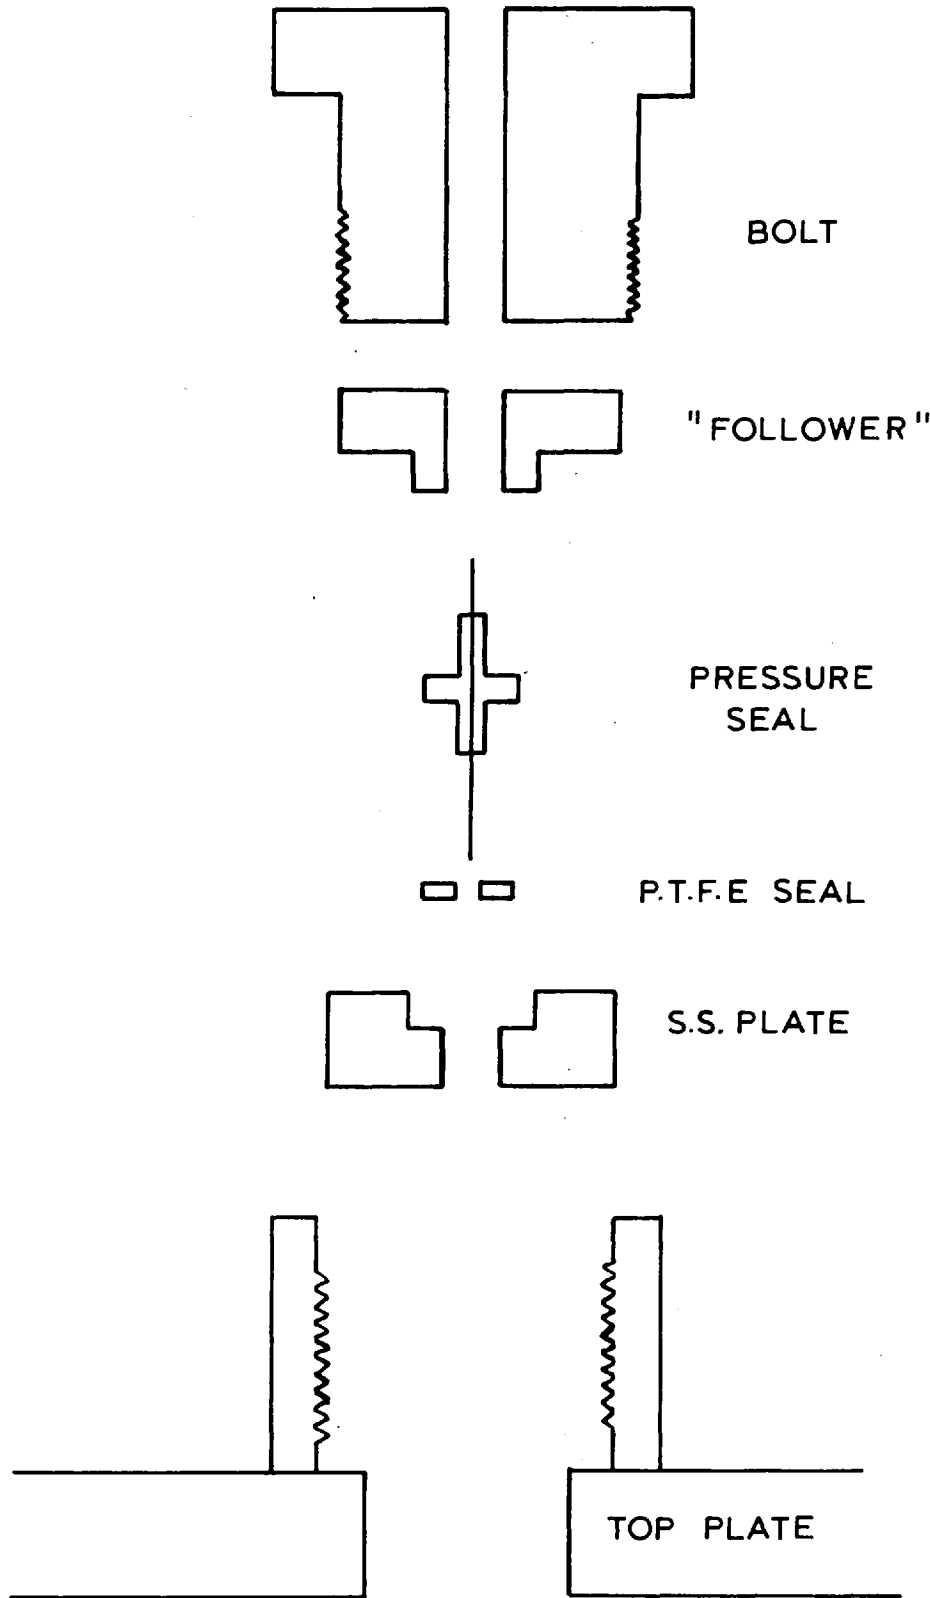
ARRANGEMENT FOR INTRODUCING SPECIMEN INTO AUTOCLAVE
